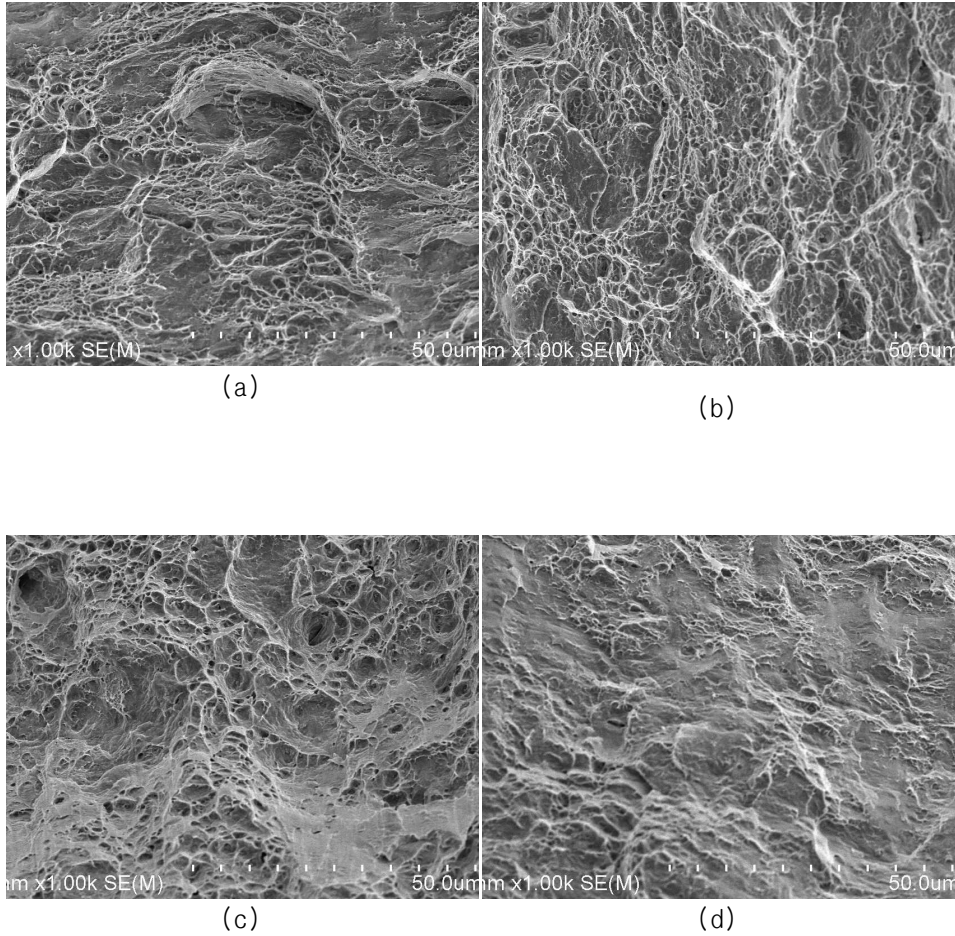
16. Fractographs showing tensile fracture surface of AZ31B sheets hot-rolled at 320°C with annealing temperatures; (a) as-rolled, (b) 200°C, (c) 300°C and (d) 400°C.
